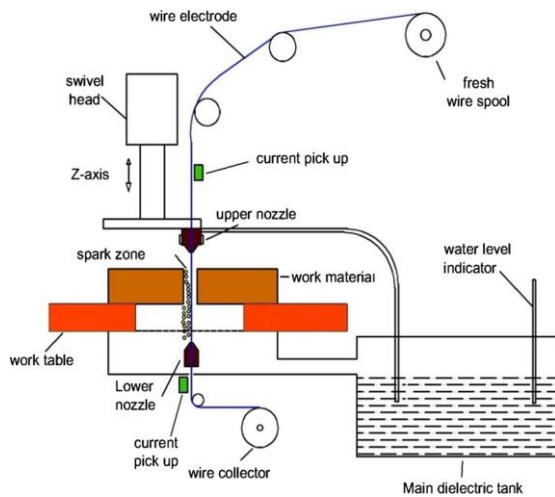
WEDM setup showing the wire electrode path, spark zone, dielectric flushing system, and key machine components [1].
